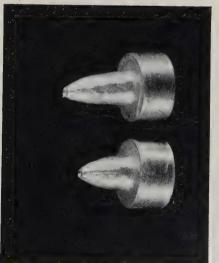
A fractured test-piece of an aluminiumcopper alloy containing 0.5% copper showing a "double-cup" fracture. Actual size.
